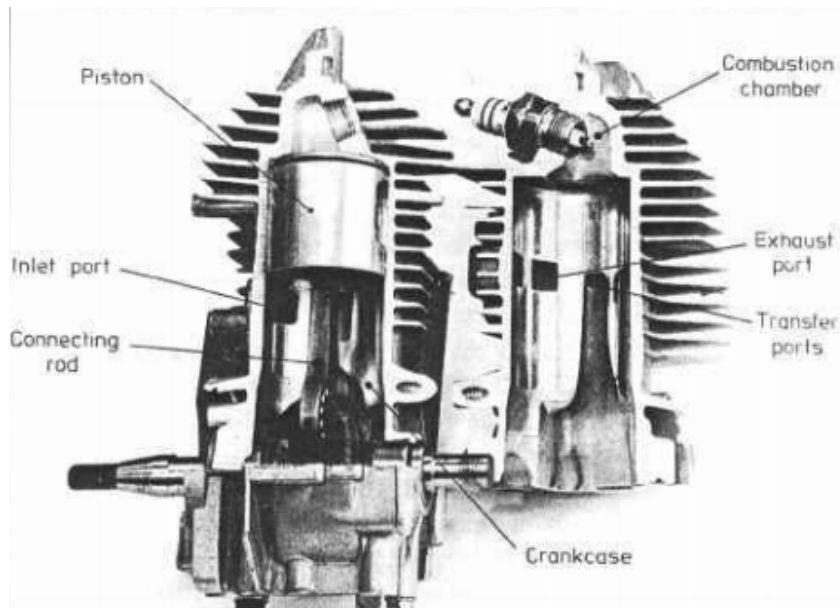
Exploded view of a simple two-stroke engine [3]
